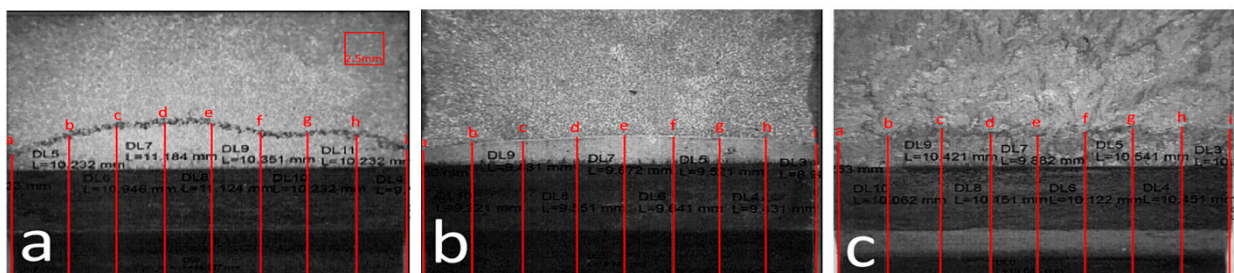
Cross section of the CTOD sample fracture surfaces and length of the crack (a to i) for (a) 1.6511, (b) 1.6511Si2V, and (c) 1.6511Si2. Note: In CFB samples, the crack lengths are more uniform compared with the no CFB sample.
